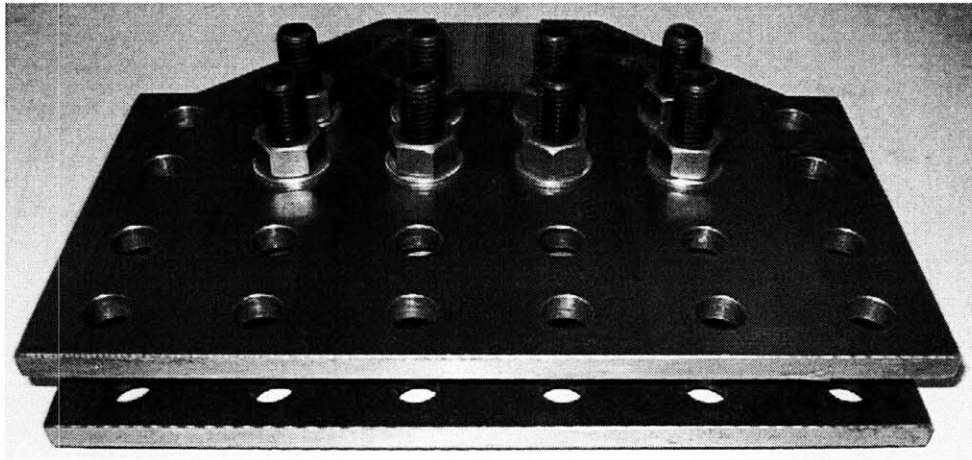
Photograph of the fixture designed for the intermediate-scale tests
